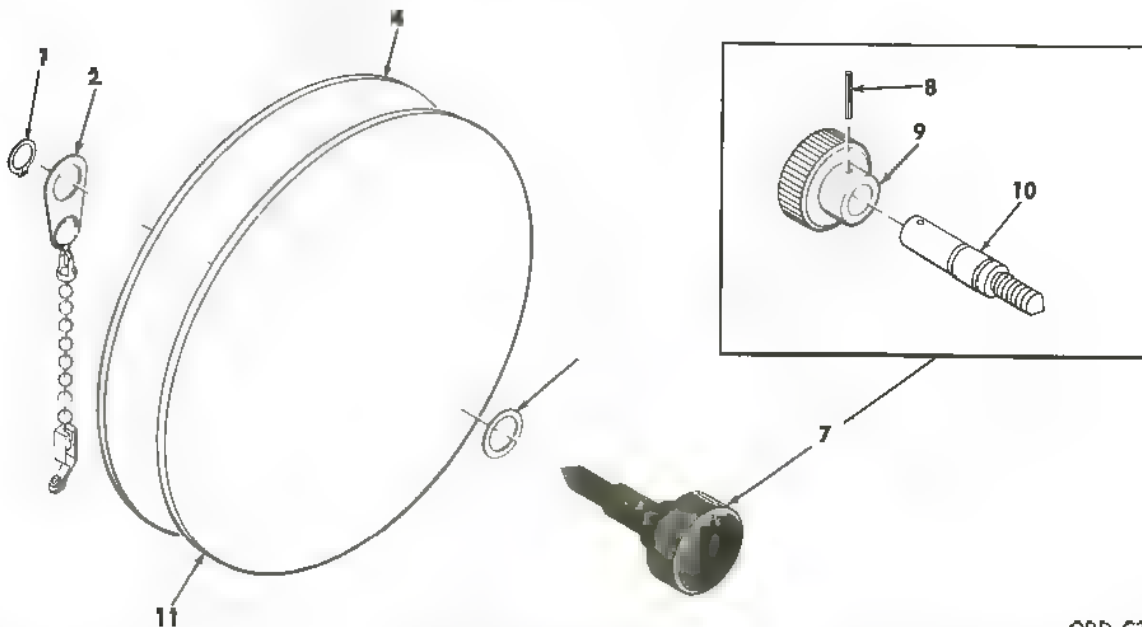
BRACKET /8171053 AND 8171659/-EXPLODED VIEW
